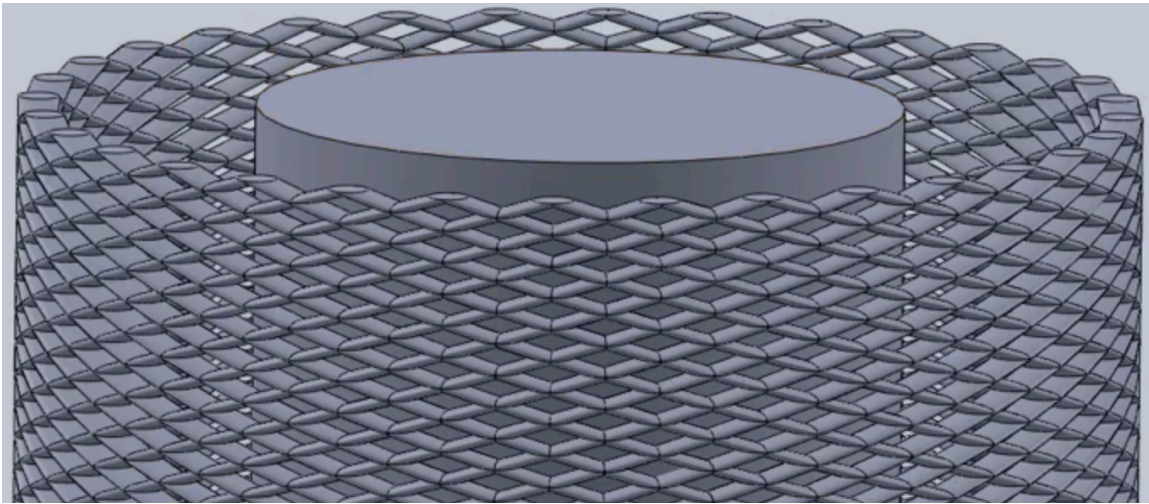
SolidWorks image of completed Solid Cylindrical Mold. Thickness of the annulus is 1.875 mm; Diameter of the inner rod is 6.35 mm. Outer diameter of the outer cylinder is 12.19 mm.
